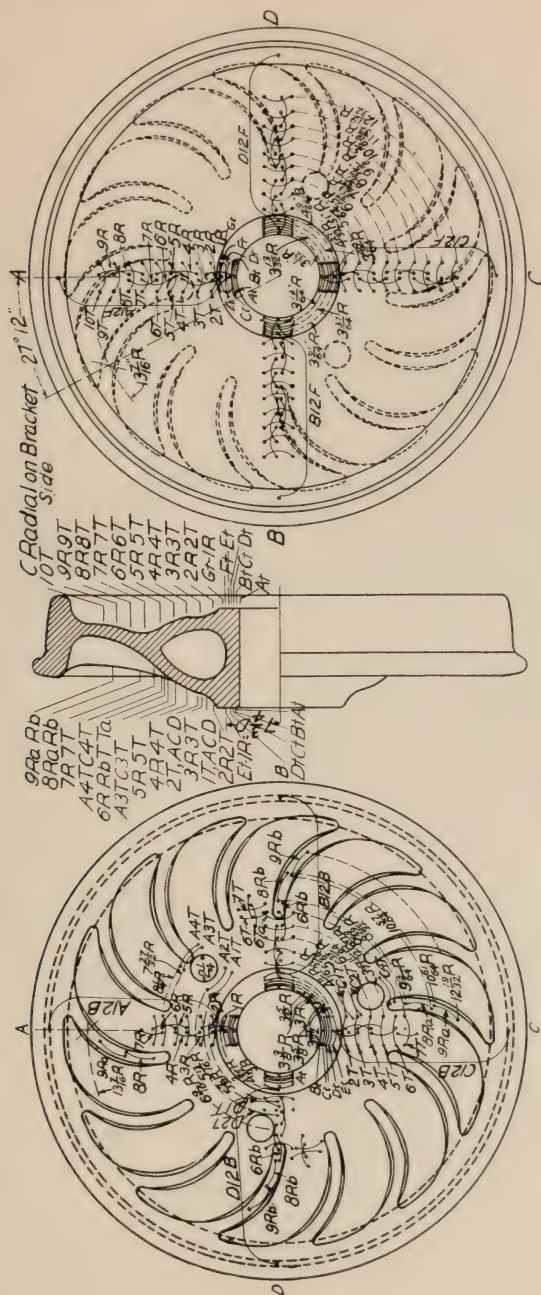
LOCATION OF GAGE-LINES ON 33-IN. 625-LB. M. C. B. WHEEL No. 809 711
